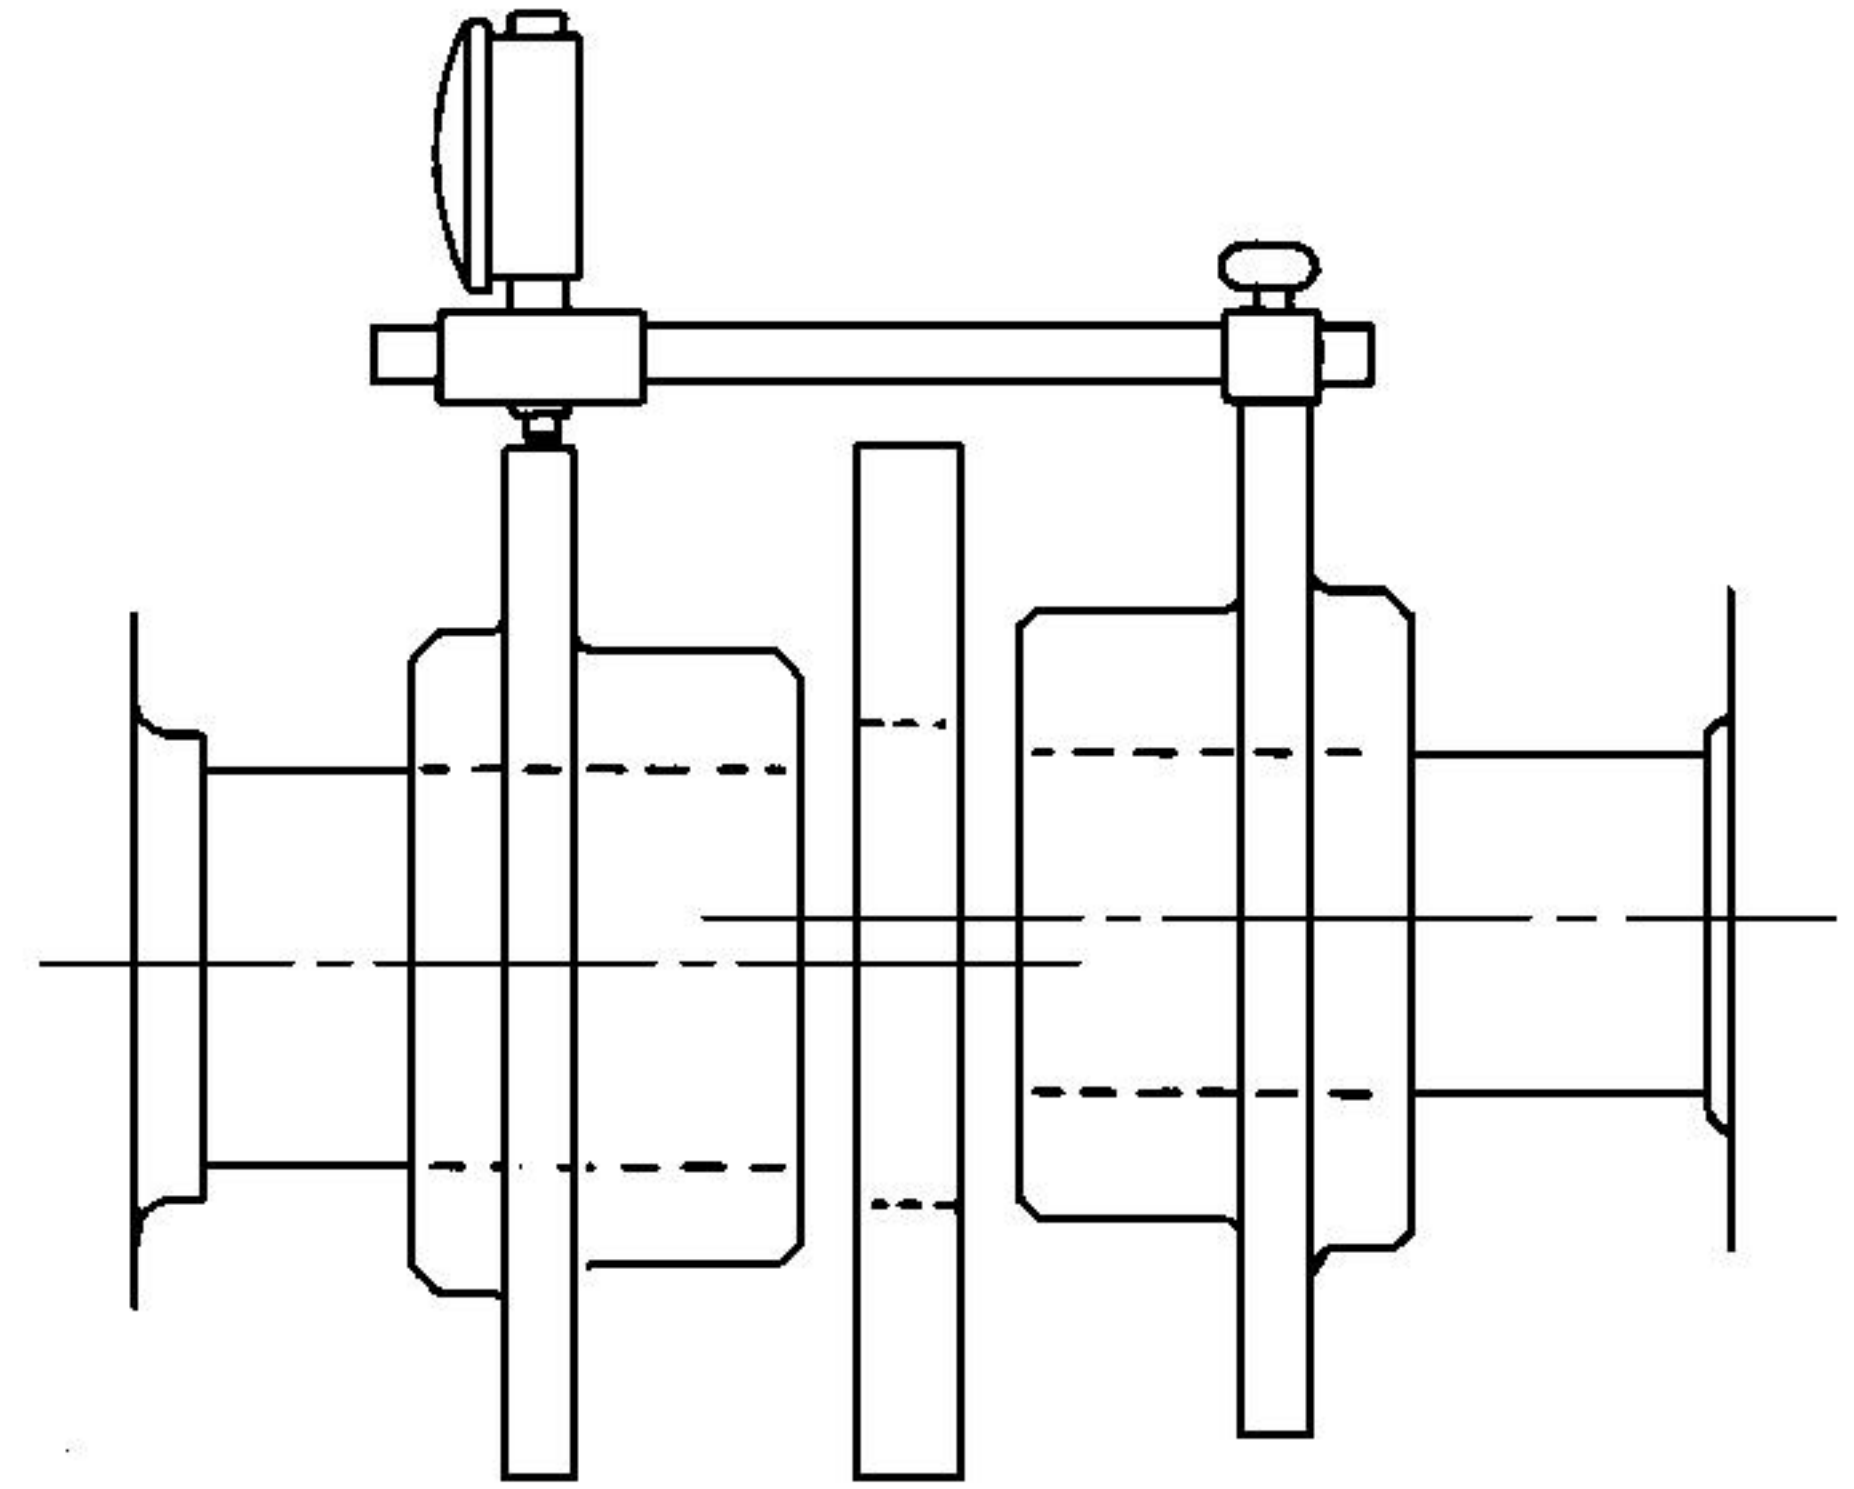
Using a dial indicator to check parallel misalignment.
